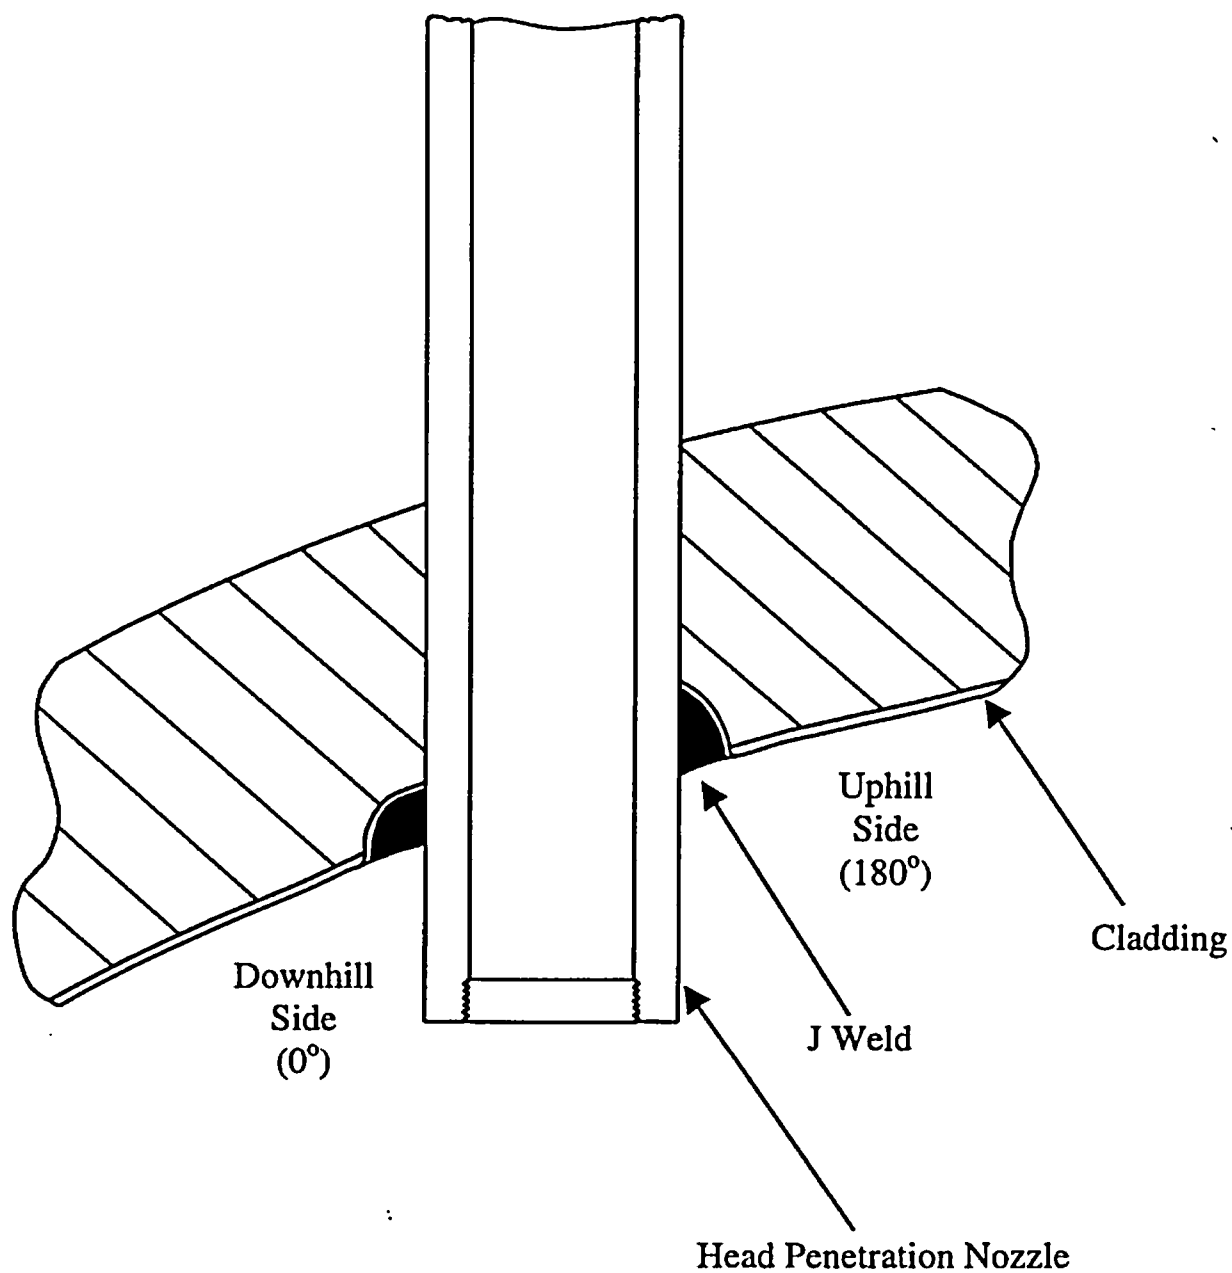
Reactor Vessel Control Rod Drive Mechanism (CRDM) Penetration
